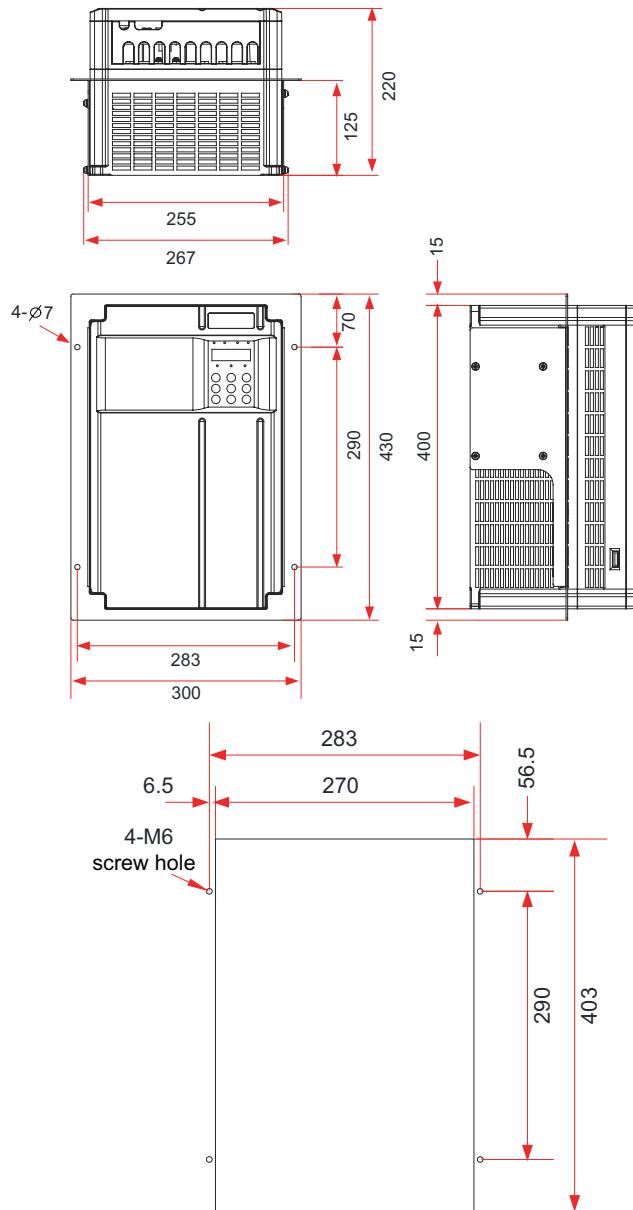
Through-hole mounting bracket and mounting hole dimensions for 30-37 kW AC drive models (mm)
